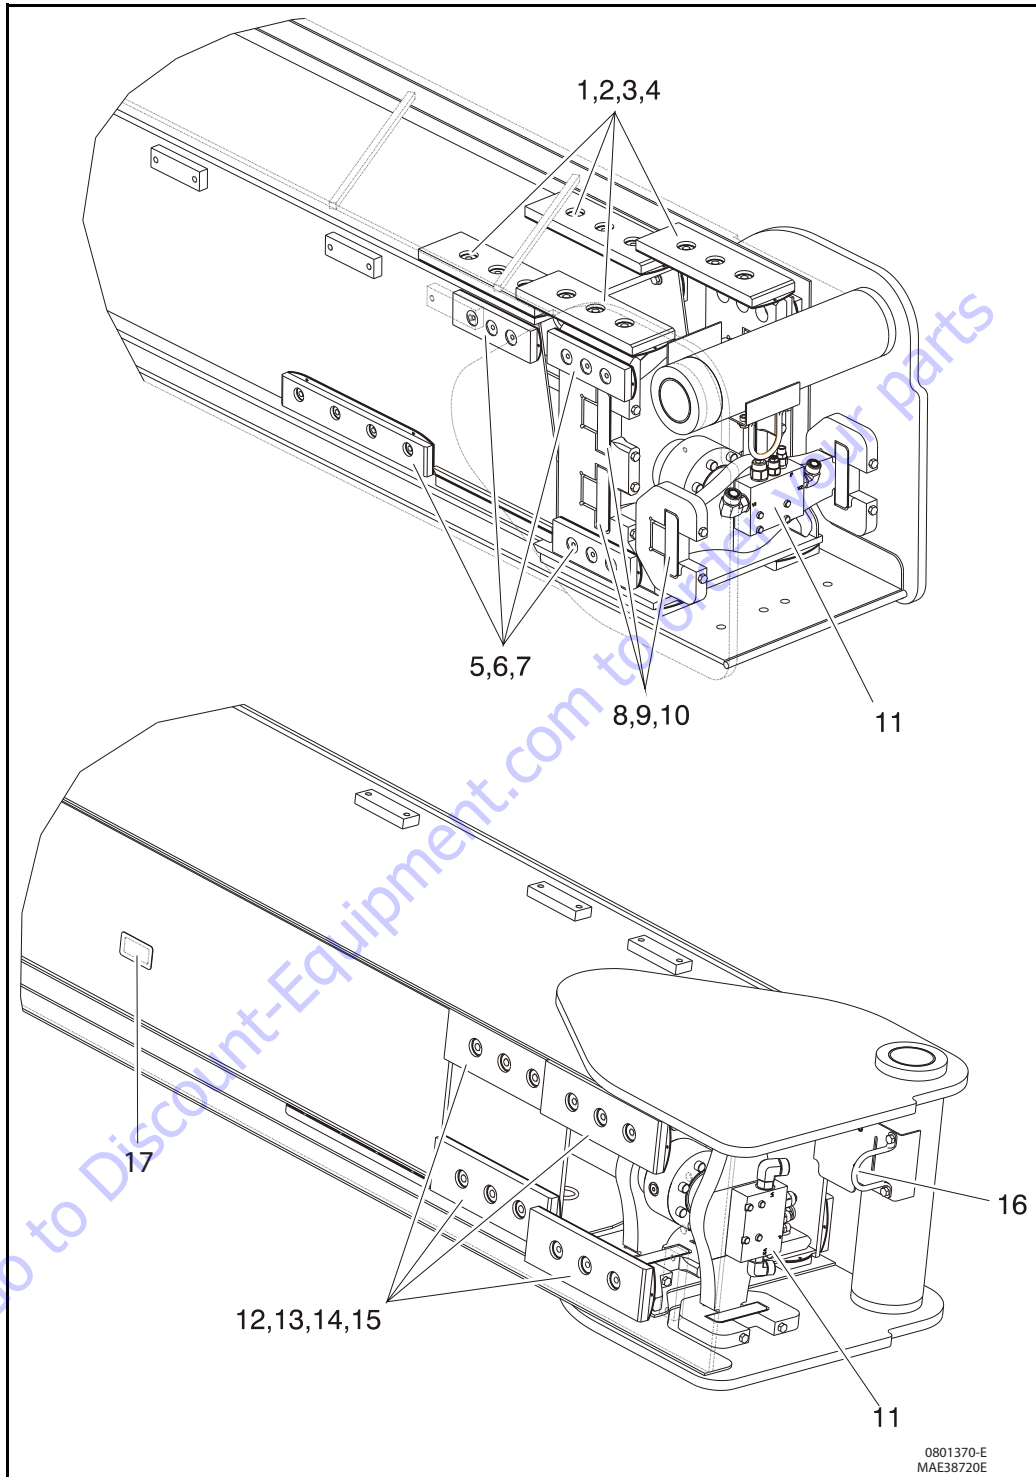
Tower Boom Assembly - Sheet 1 of 3
